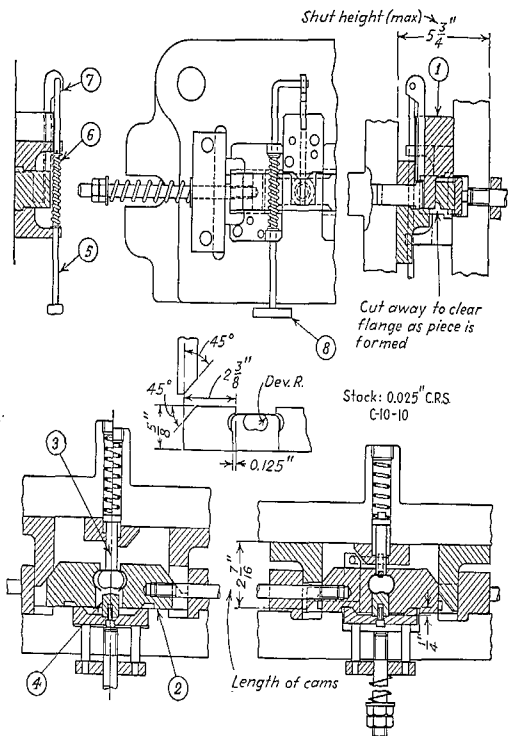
Mandrel-type cam-actuated forming die. (Harig Mfg. Corp.)
